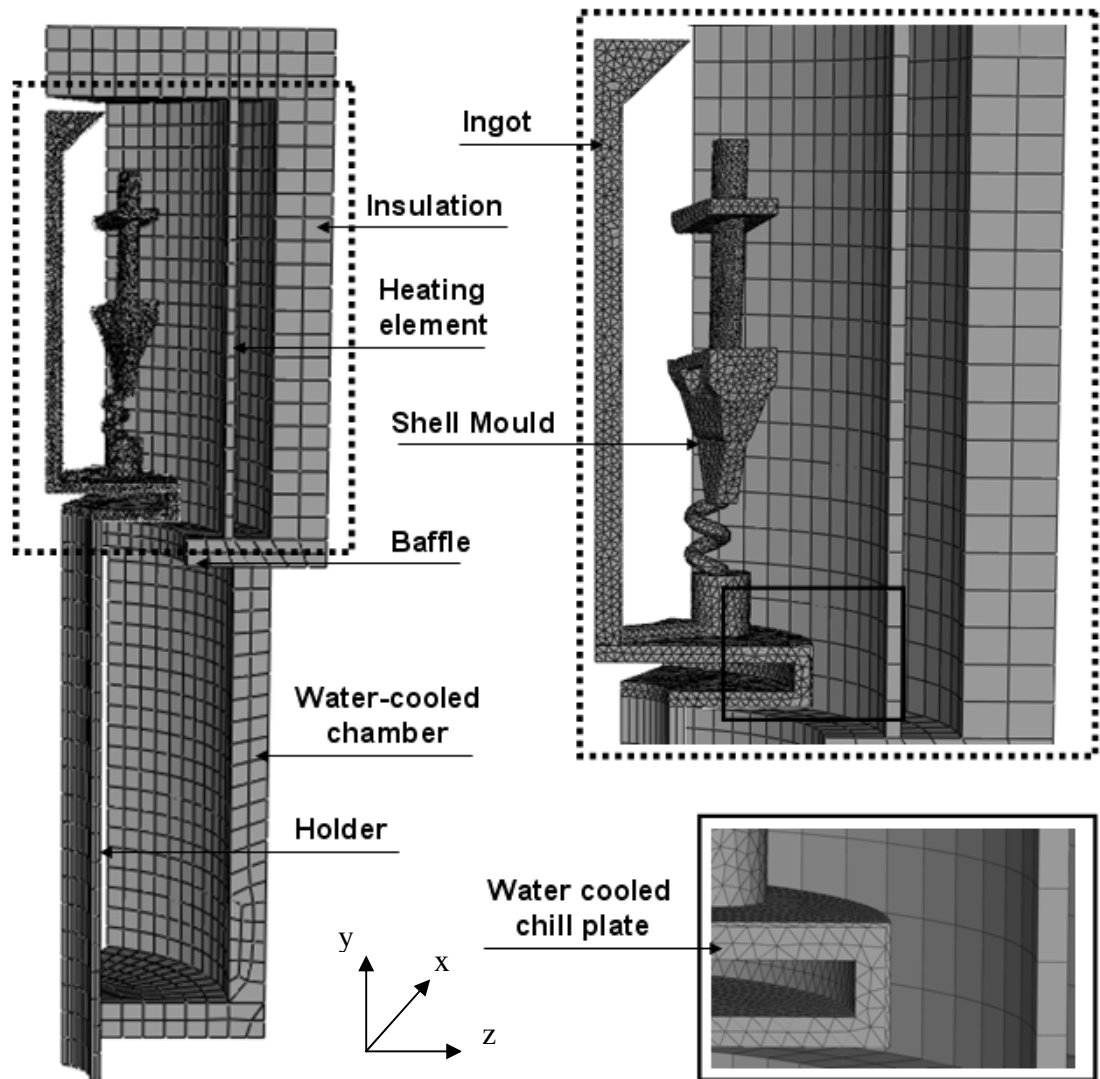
FE model of the mould, ingot and furnace. Enlarged figures of the hot chamber and the water cooled chill plate
